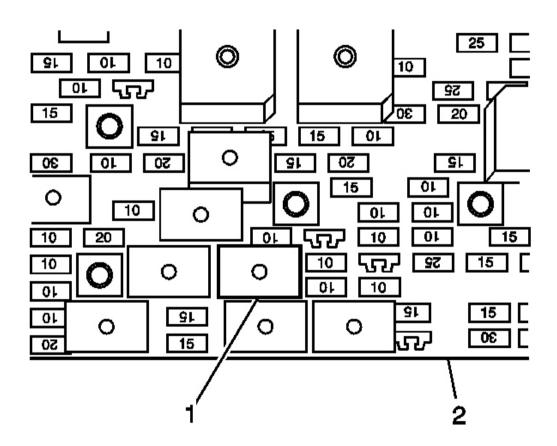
A/C Compressor Relay & Convenience Center Courtesy of GENERAL MOTORS CORP.
